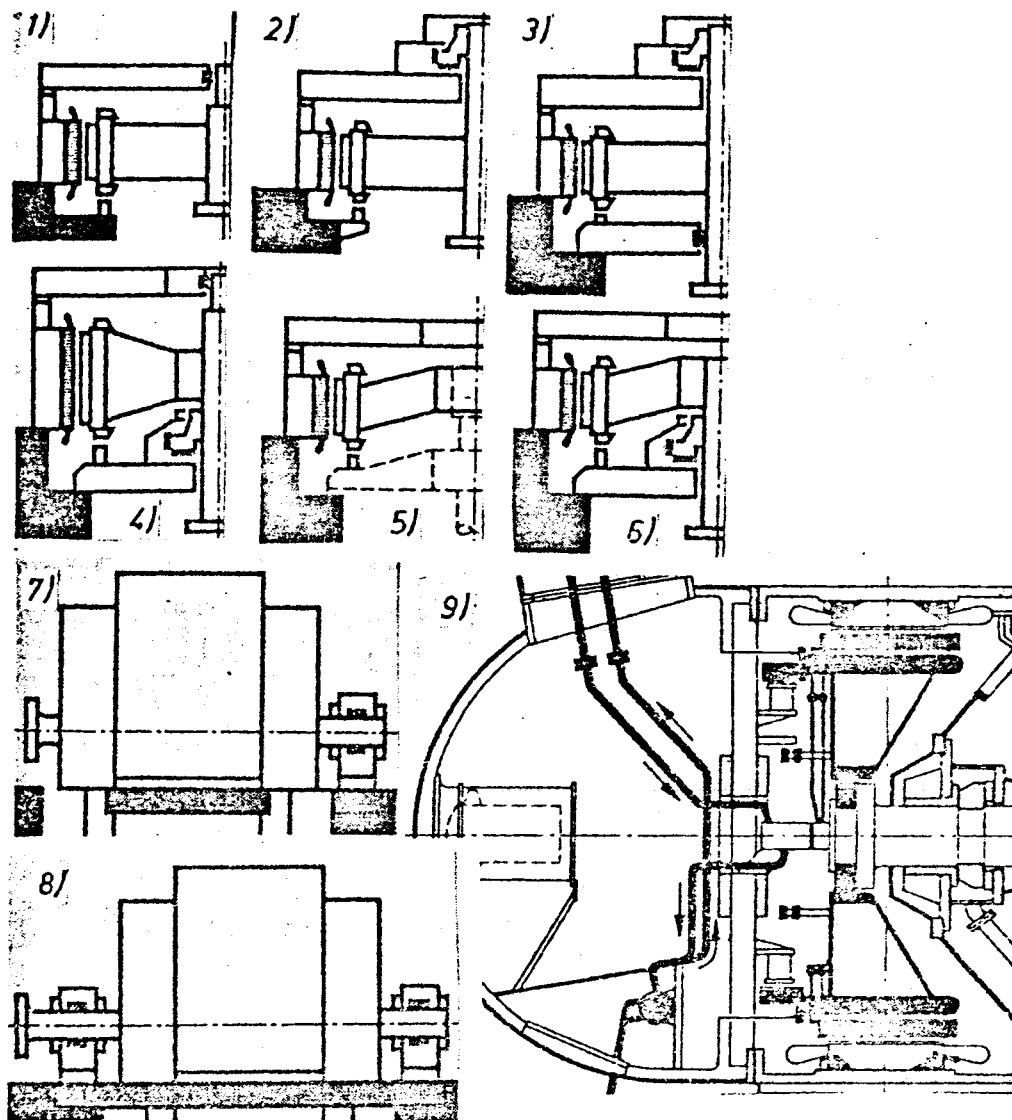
Typical arrangements of bearings in hydroelectric generators. 1 one guide bearing above generator rotor (= gr); 2 combined guide and thrust bearing above gr; 3 combined guide and thrust bearing above gr, guide bearing below gr; 4 guide bearing above and combined guide and thrust bearing below gr; 5 overhung design with guide bearing below gr; 6 overhung design with combined guide and thrust bearing below gr; 7 horizontal shaft with guide bearing at one side of gr; 8 ditto with guide bearings at each side of gr; 9 alternator of bulb turbines of Lechwerke with water-cooled rotor. Lech plant of BAWAG, München, West Germany. $P = 4,45 \text{ MVA}$, $n = 167 \text{ rpm}$. (Drawing courtesy Siemens, Erlangen.)
